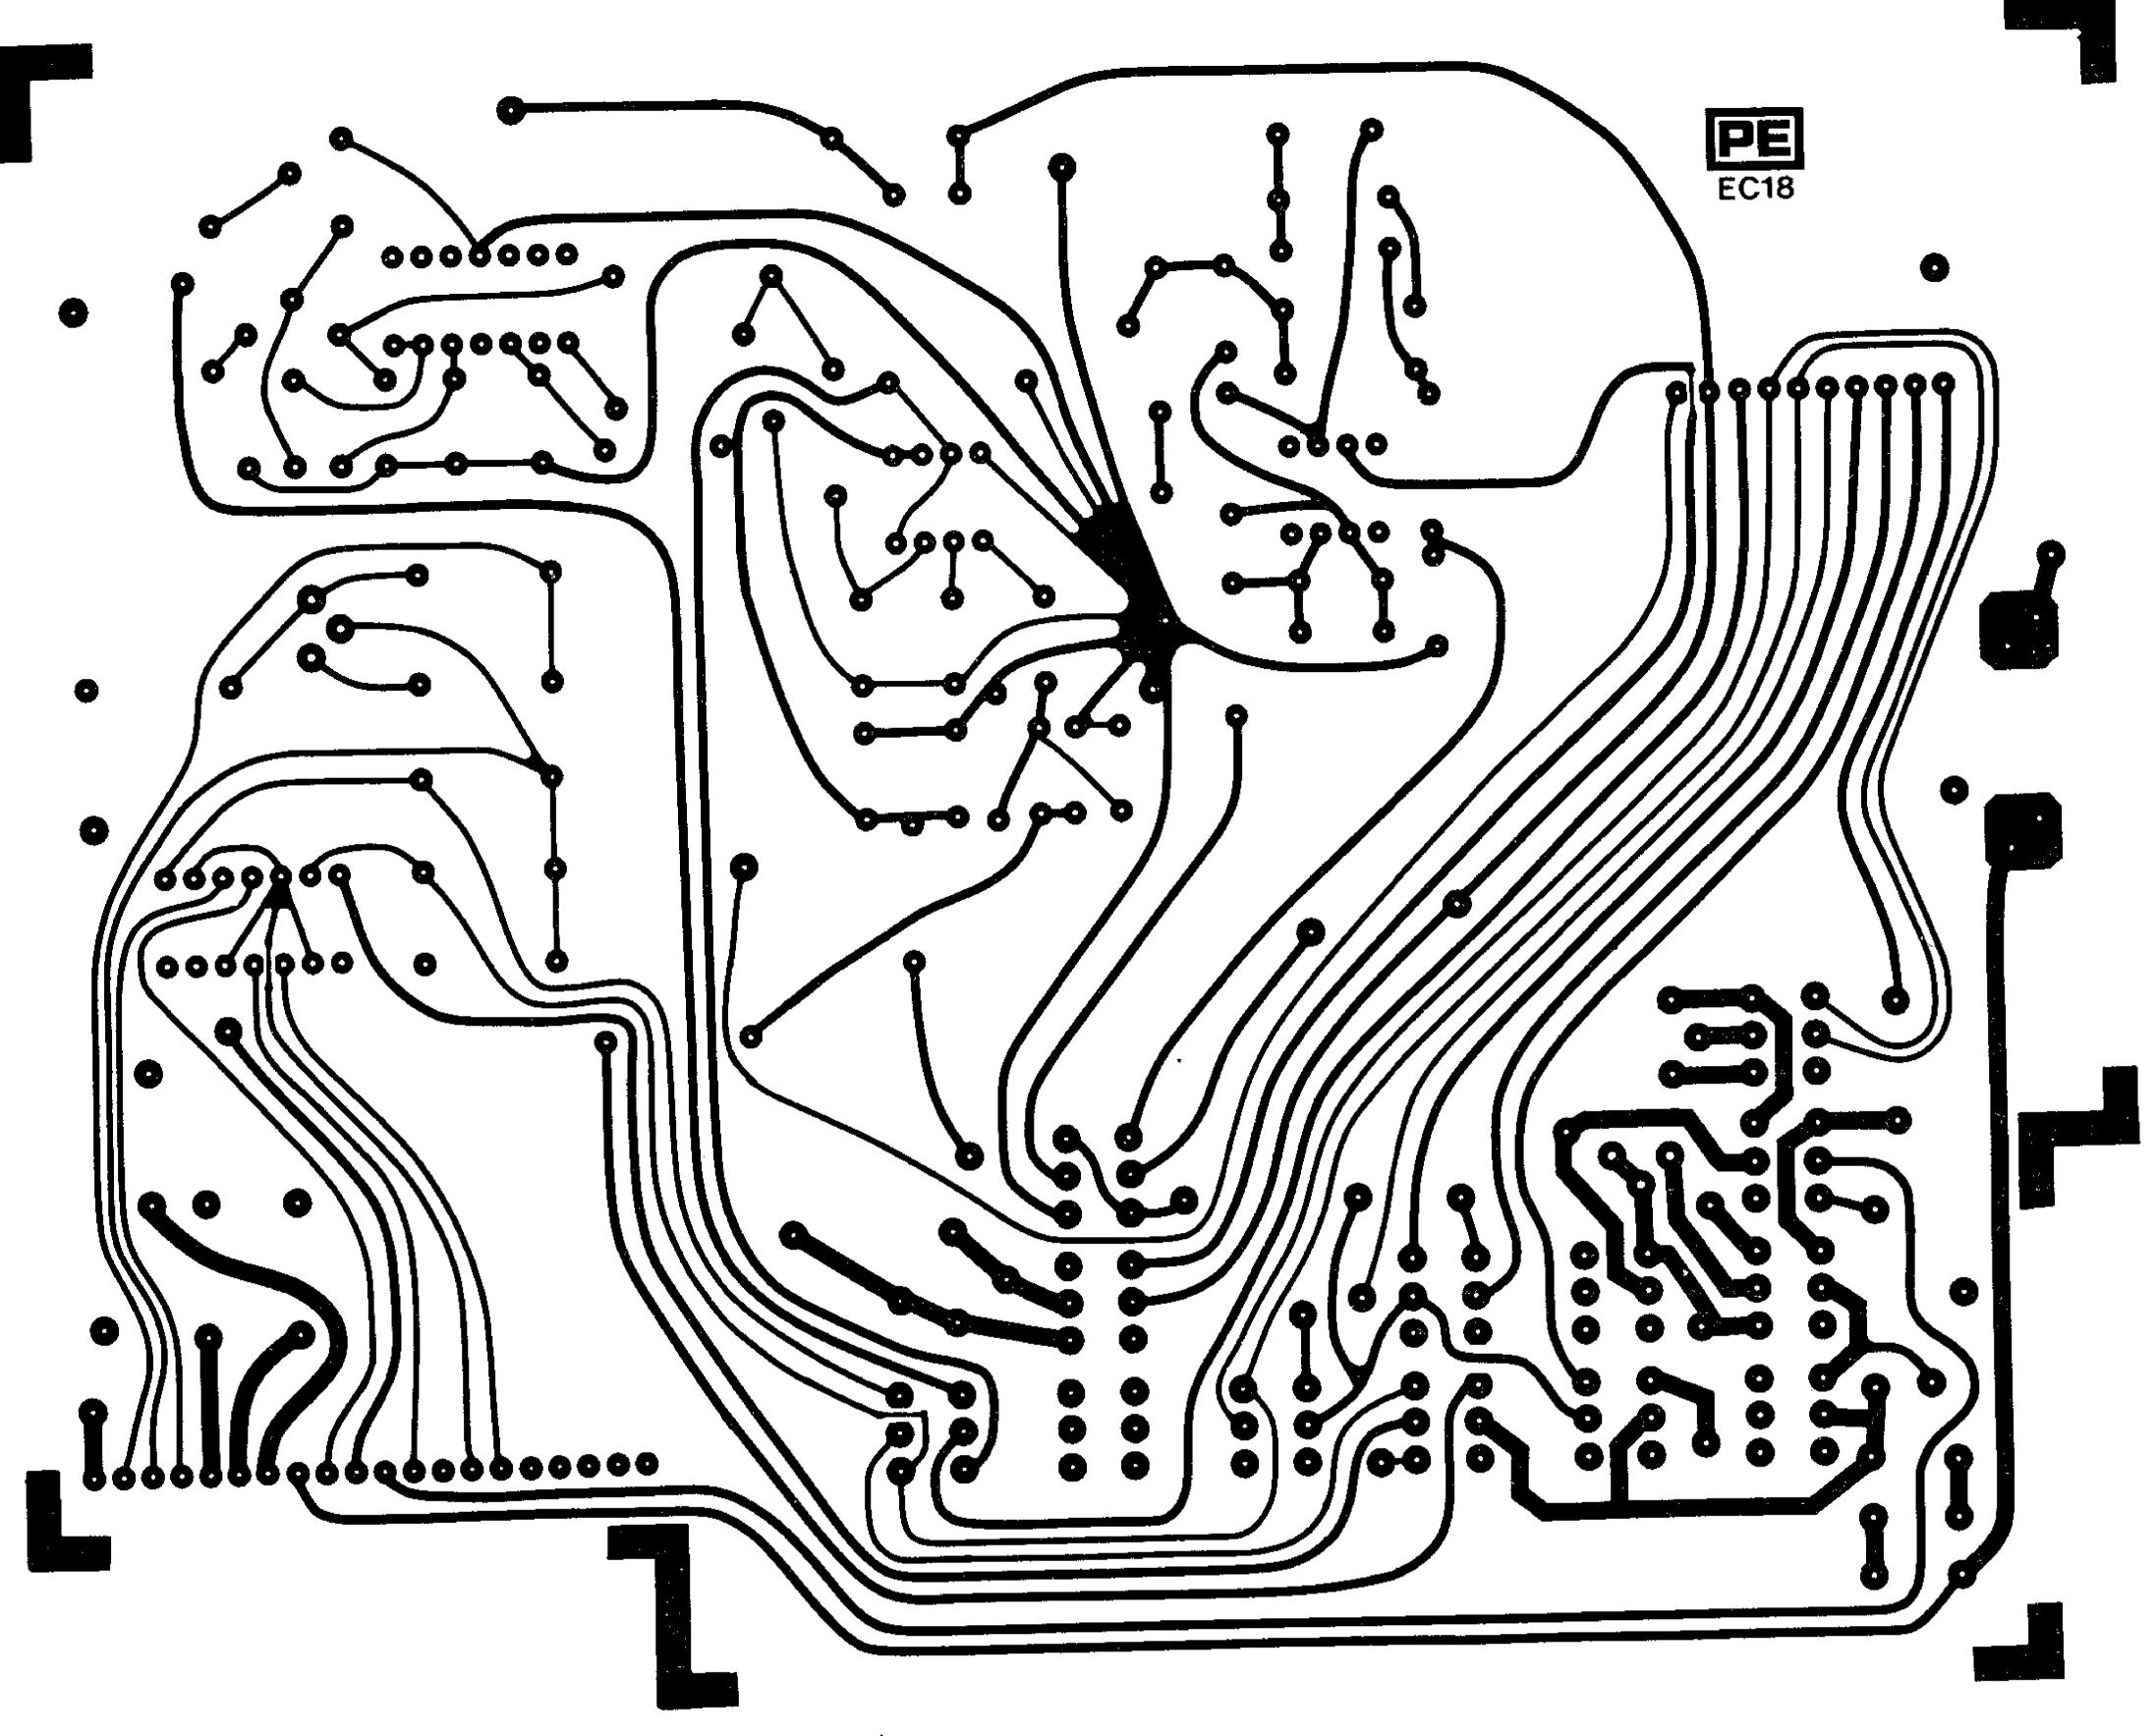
Main Board p.c.b. (copper side, actual size)
